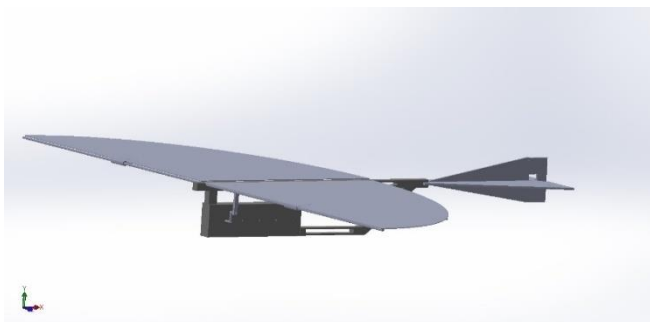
CAD assembly of Ornithopter designed in SolidWorks and Fusion 360
